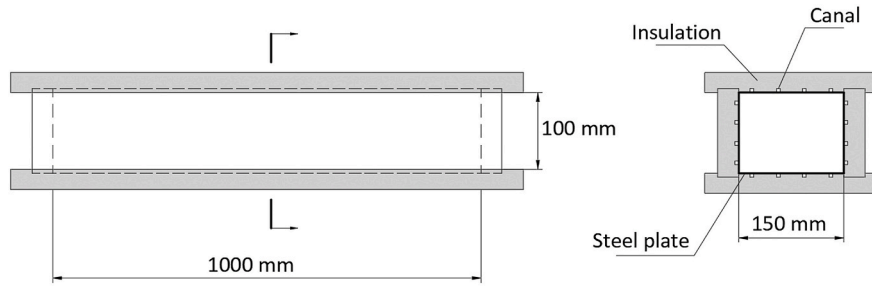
Front view (left) and cutaway view (right) of the mould of Autogenous Deformation Testing Machine (ADTM).
